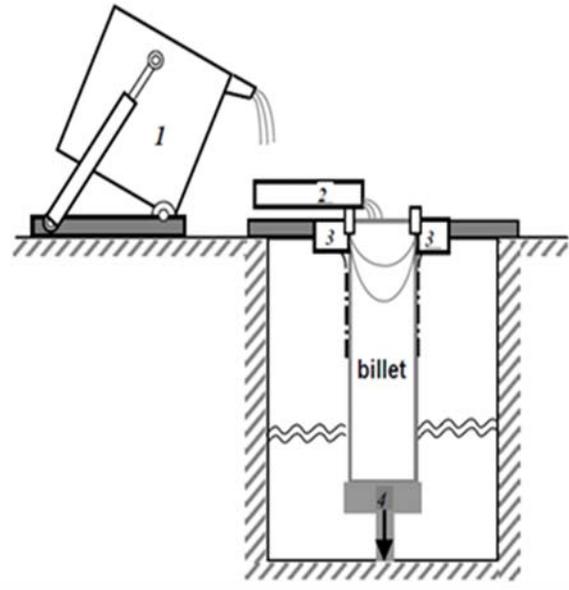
Schematic diagram of DC casting apparatus. 1) tilting furnace, 2) launder, 3) hot-top round mold, and 4) bottom block [2].
